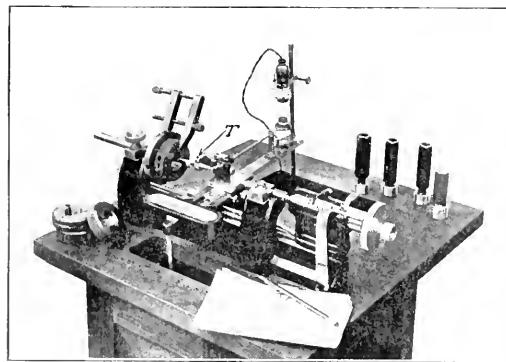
METHOD OF MEASUREMENT OF PITCH OR LEAD OF A RING THREAD GAGE
